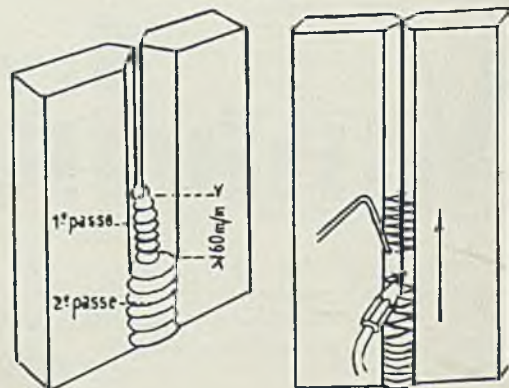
(Left)—Upward welding with the oxyacetylene process, using two torches. Fig. 3 (Right)—Upward welding of beveled plates, using two torches
